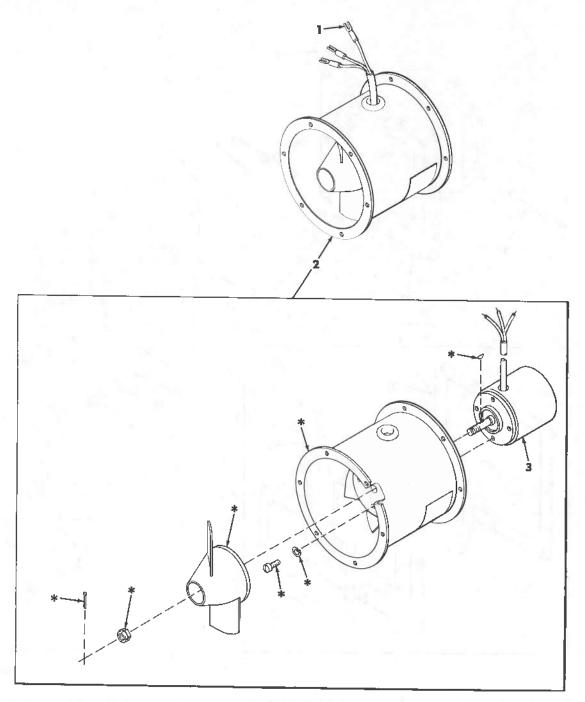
HOUSING, BLOWER /8000823/-EXPLODED VIEW /SEE FIGURE 223 FOR NEXT HIGHER ASSEMBLY/
